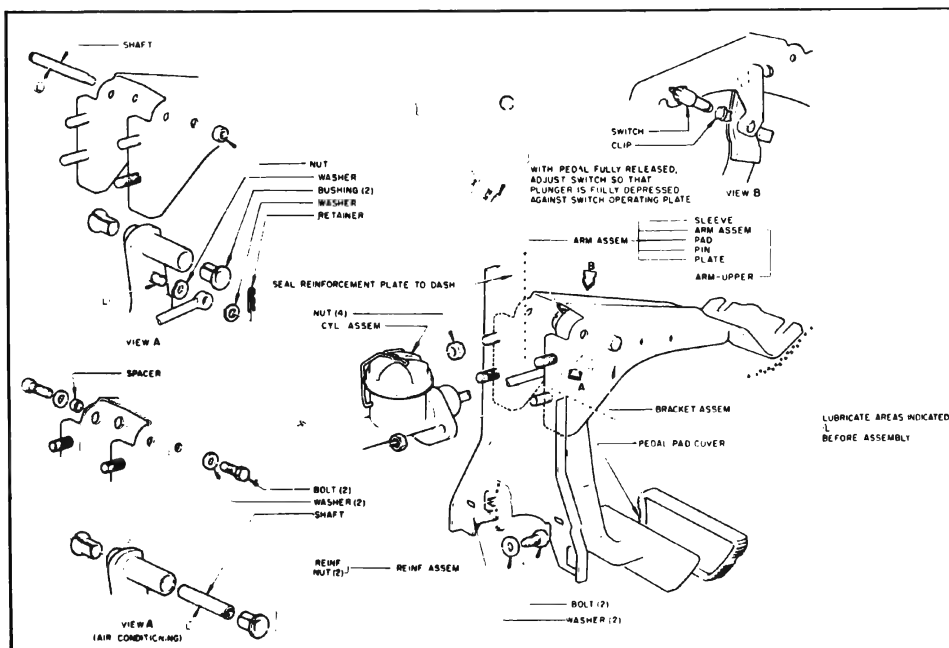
Standard Brake Pedal and Master Cylinder Installation (Automatic)
